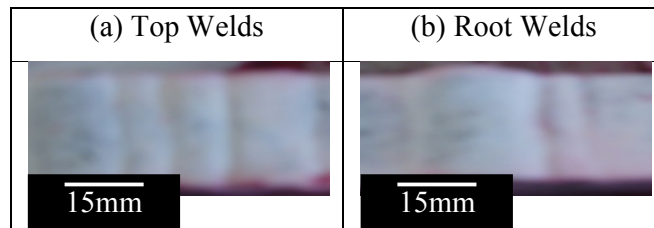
Liquid Penetrant Inspection of Specimen 2
